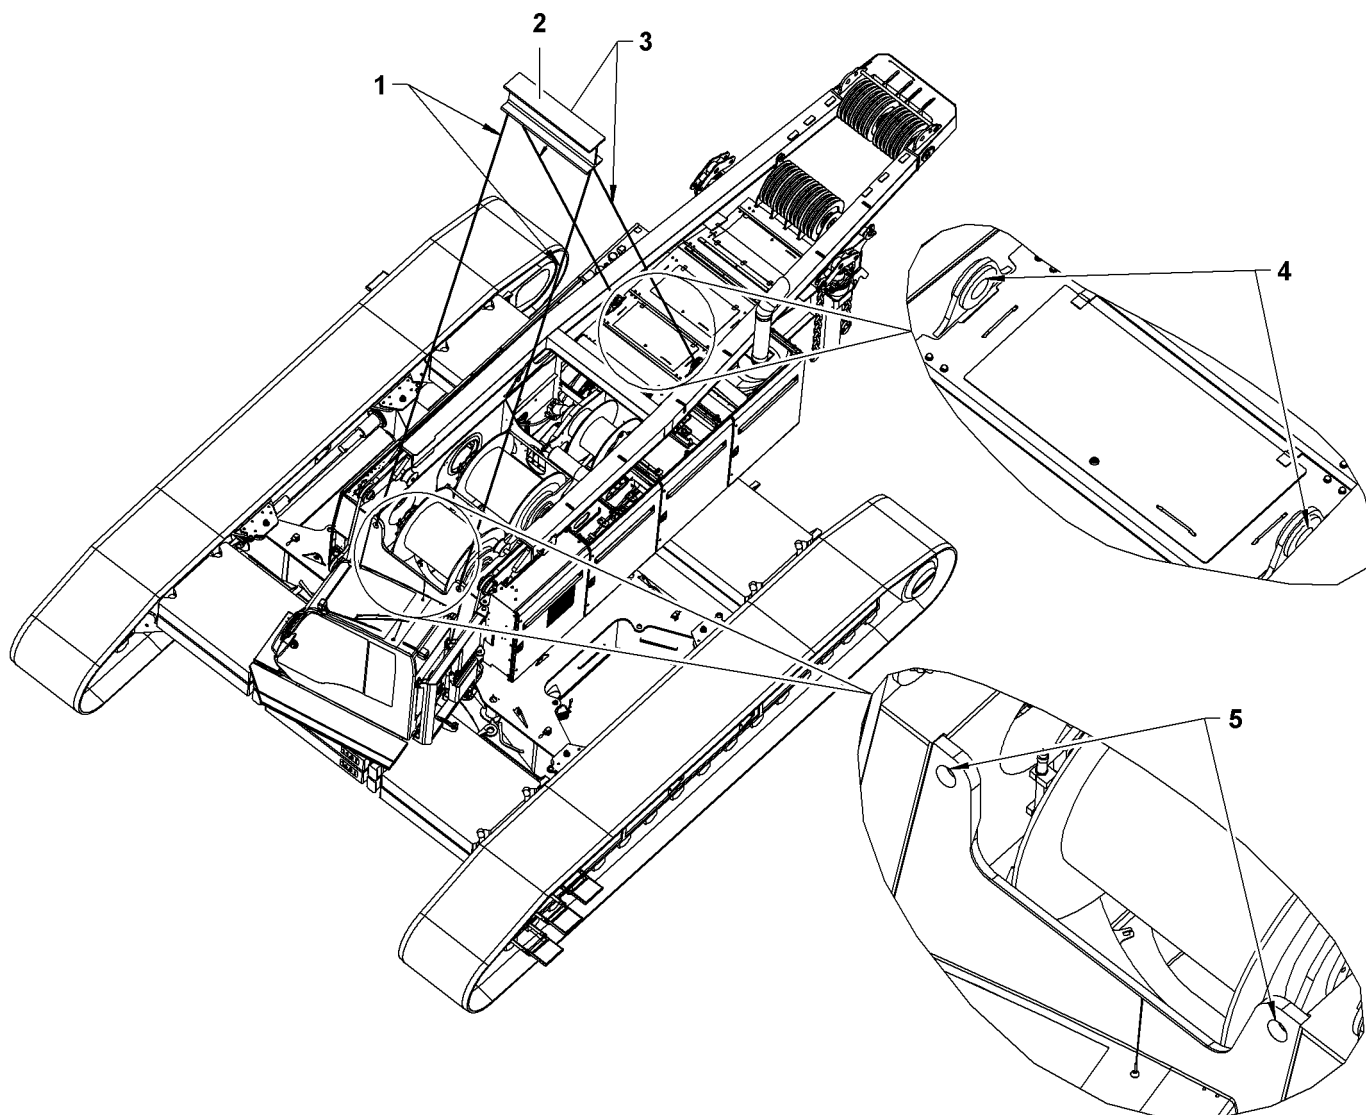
Loading the basic machine with crawler side frame and carbody counterweight - lifting points
